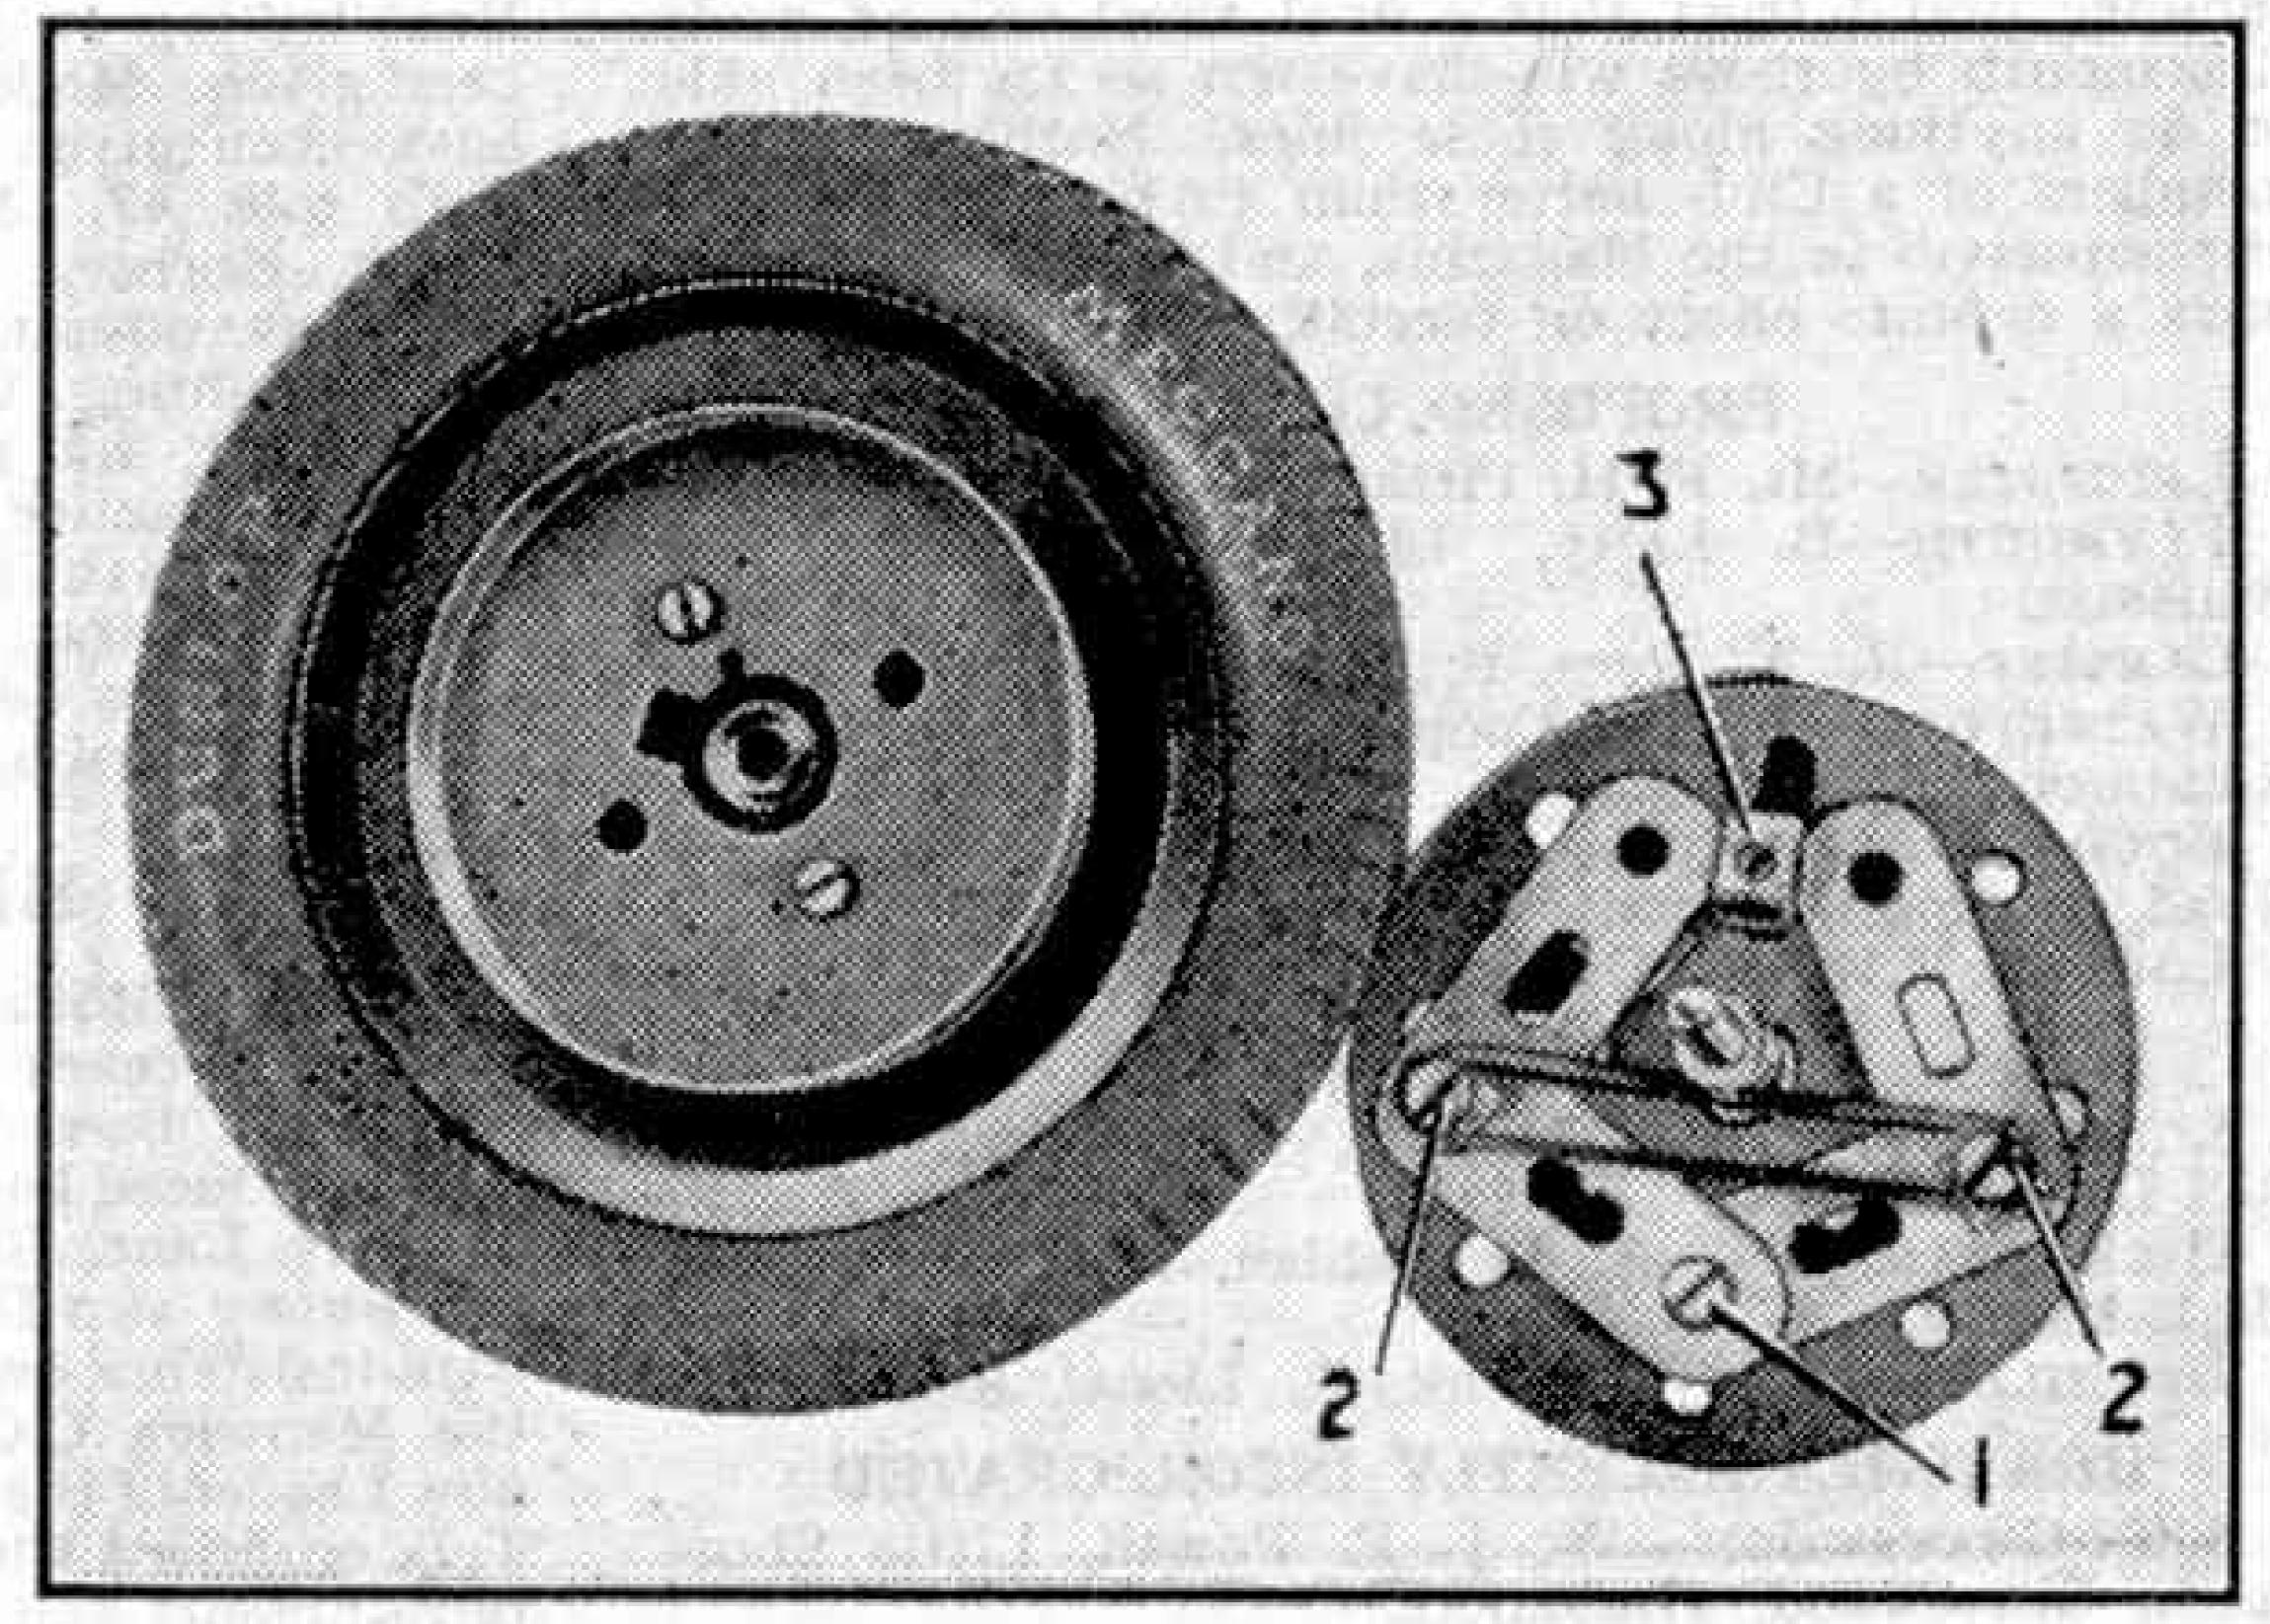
The internal expanding brake described on this page shown with the wheel removed from the axle.
